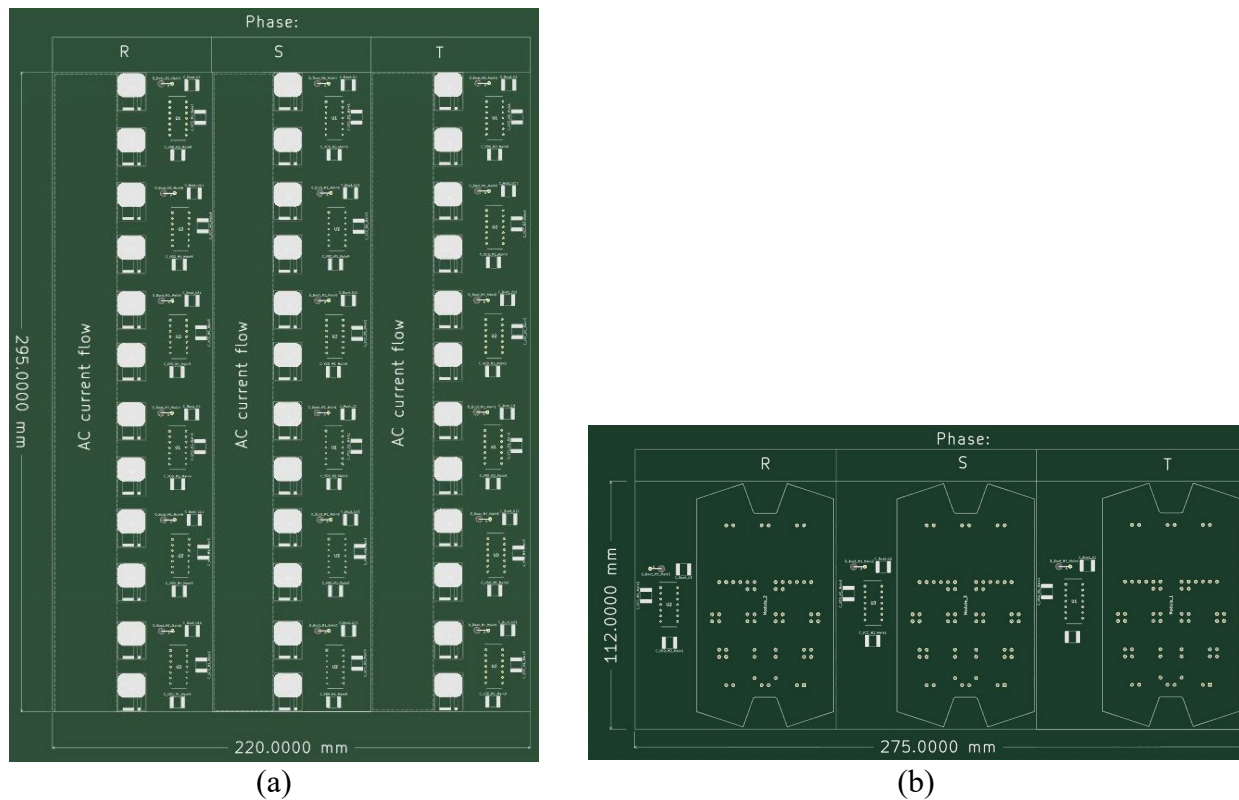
PCB area required for the motor drive power stage with (a) space graded Si MOSFETs and (b) SiC modules.
